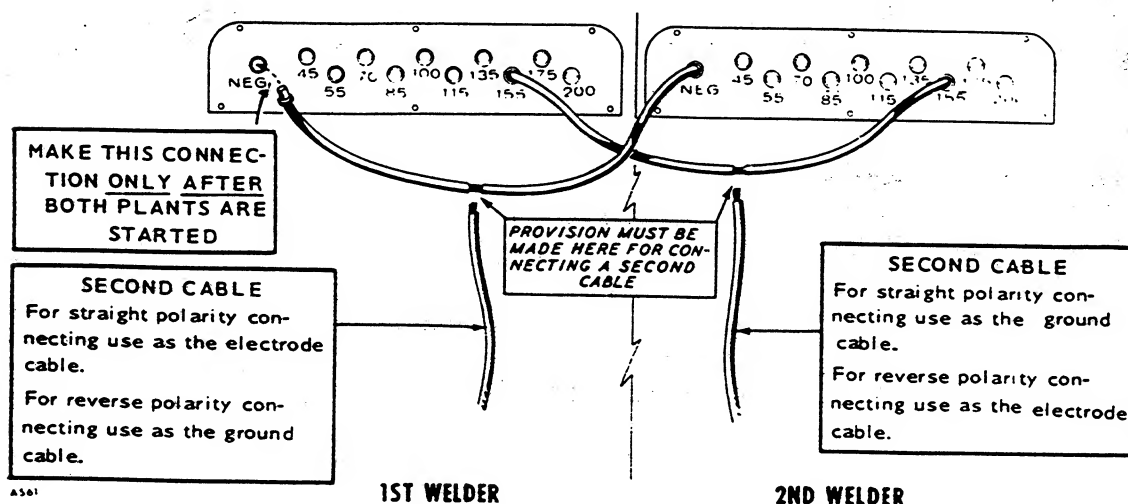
CONNECTIONS FOR WELDING IN PARALLEL
